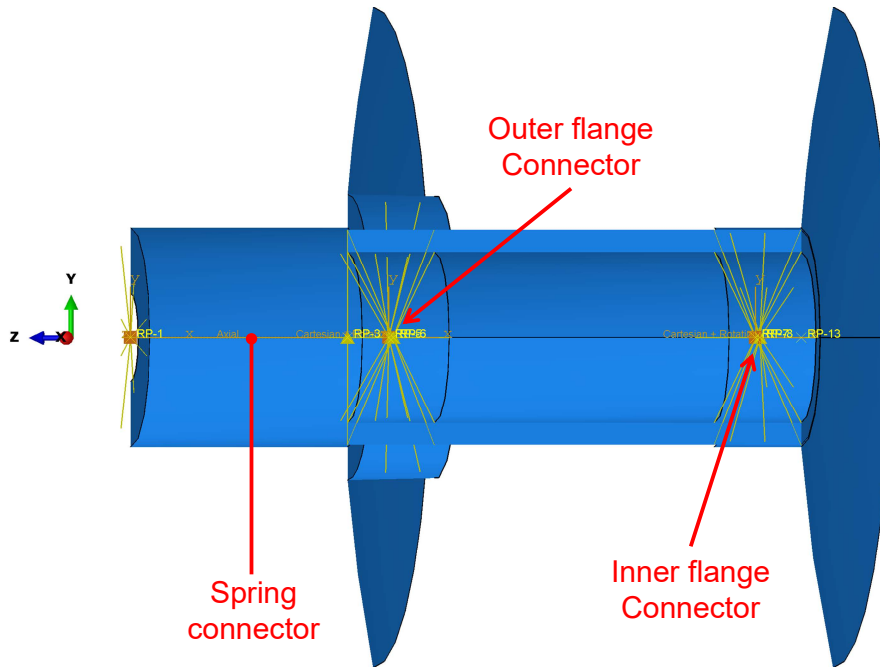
Cross-section of the spring-rod-flange model using connectors
